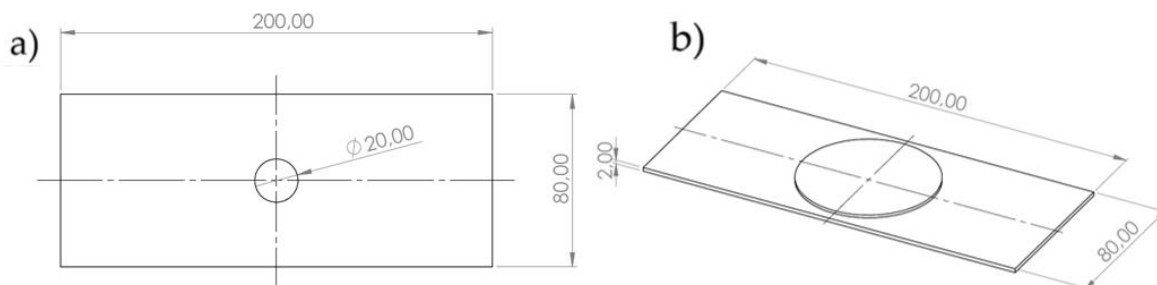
Geometric dimensions of: a) the plate with a hole, b) repaired specimens
